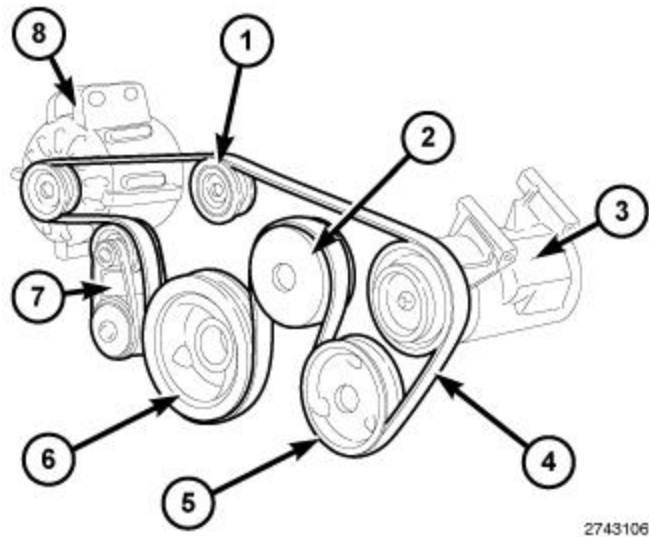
Identifying Drive Belt Tensioners & Accessory Drive Belt
